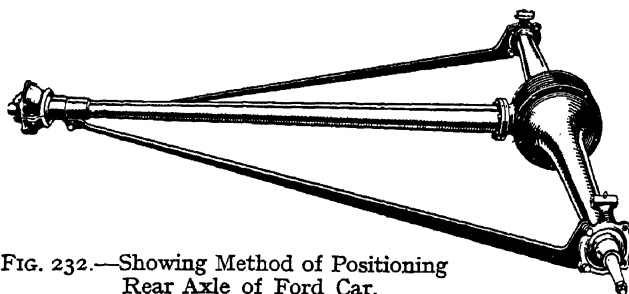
Showing Method of Positioning Rear Axle of Ford Car.
